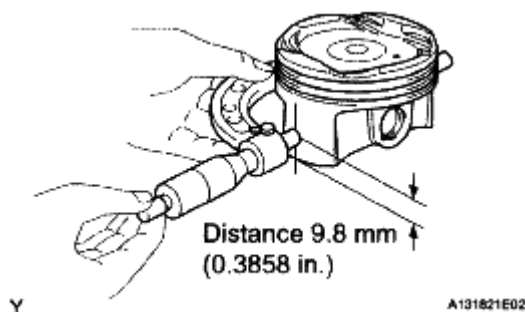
Measuring Piston Diameter At Right Angles To Piston Center Line Using Micrometer
